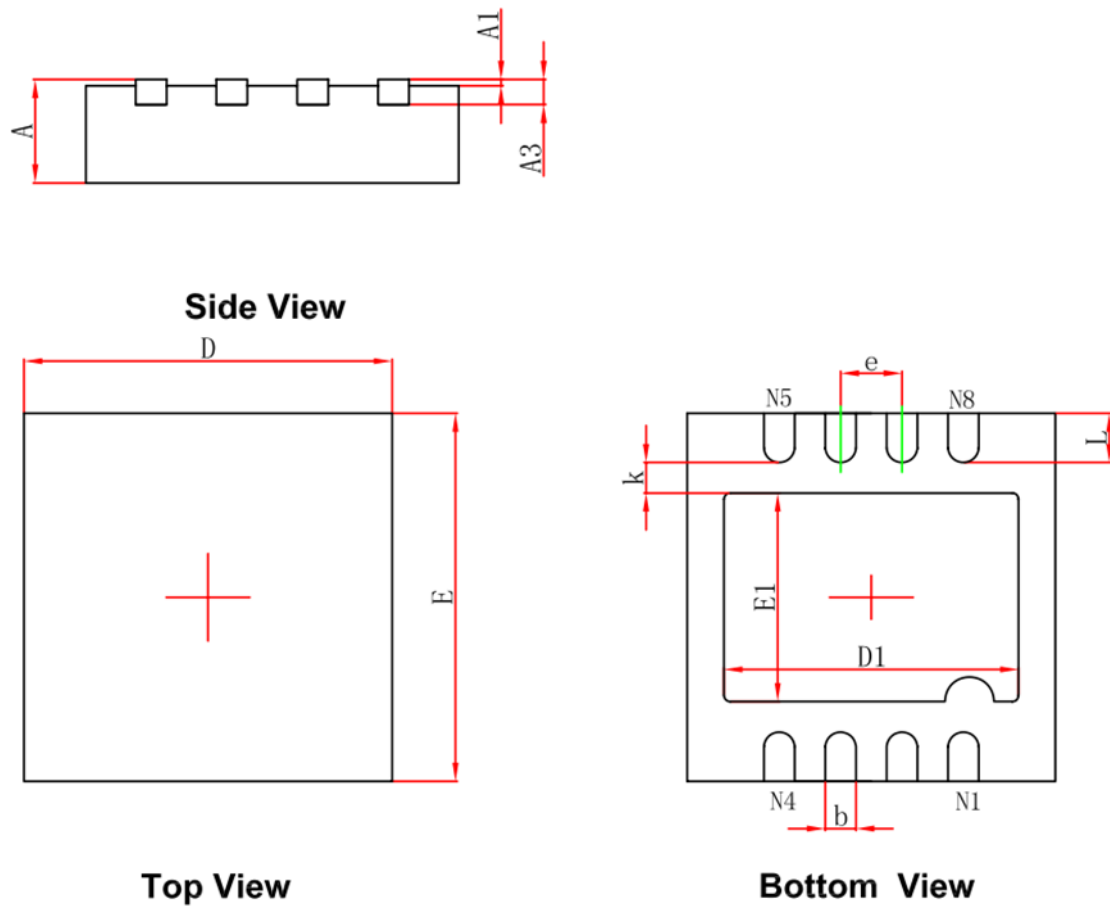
DFN8(3\*3) Package Outline Dimensions
